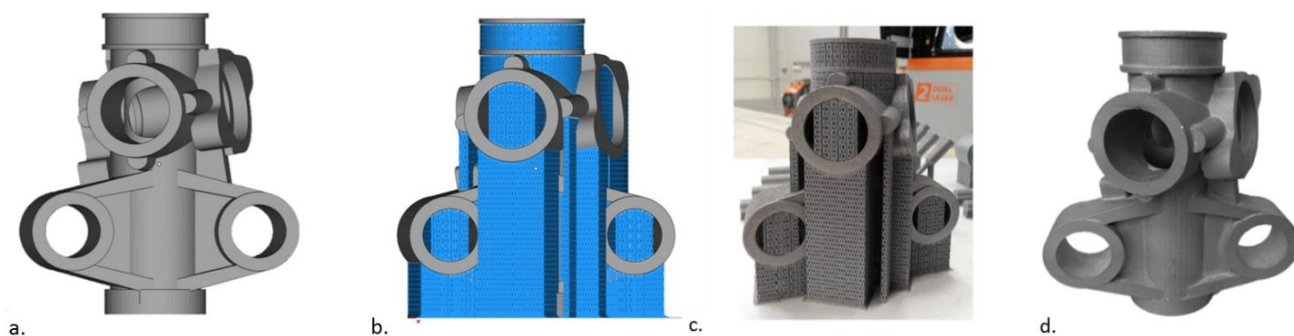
CAD model and SLM part of the automotive steering gear housing: a - CAD model of the gear housing, b - CAD model of the gear housing with added support structures, c- the gear housing with support structures fabricated using the SLM method, d - cleaned gear housing fabricated using the SLM method
